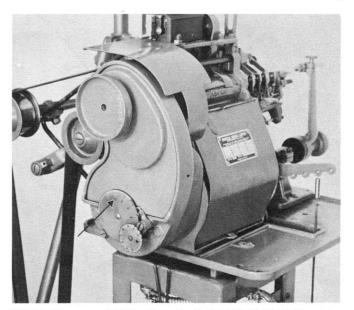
Gainer adjuster for opening and closing the wire lay on the No. 84 Coil Winder. "O" on the adjuster dial is the extreme closed position with "head wind" and the extreme open position for "after wind".
